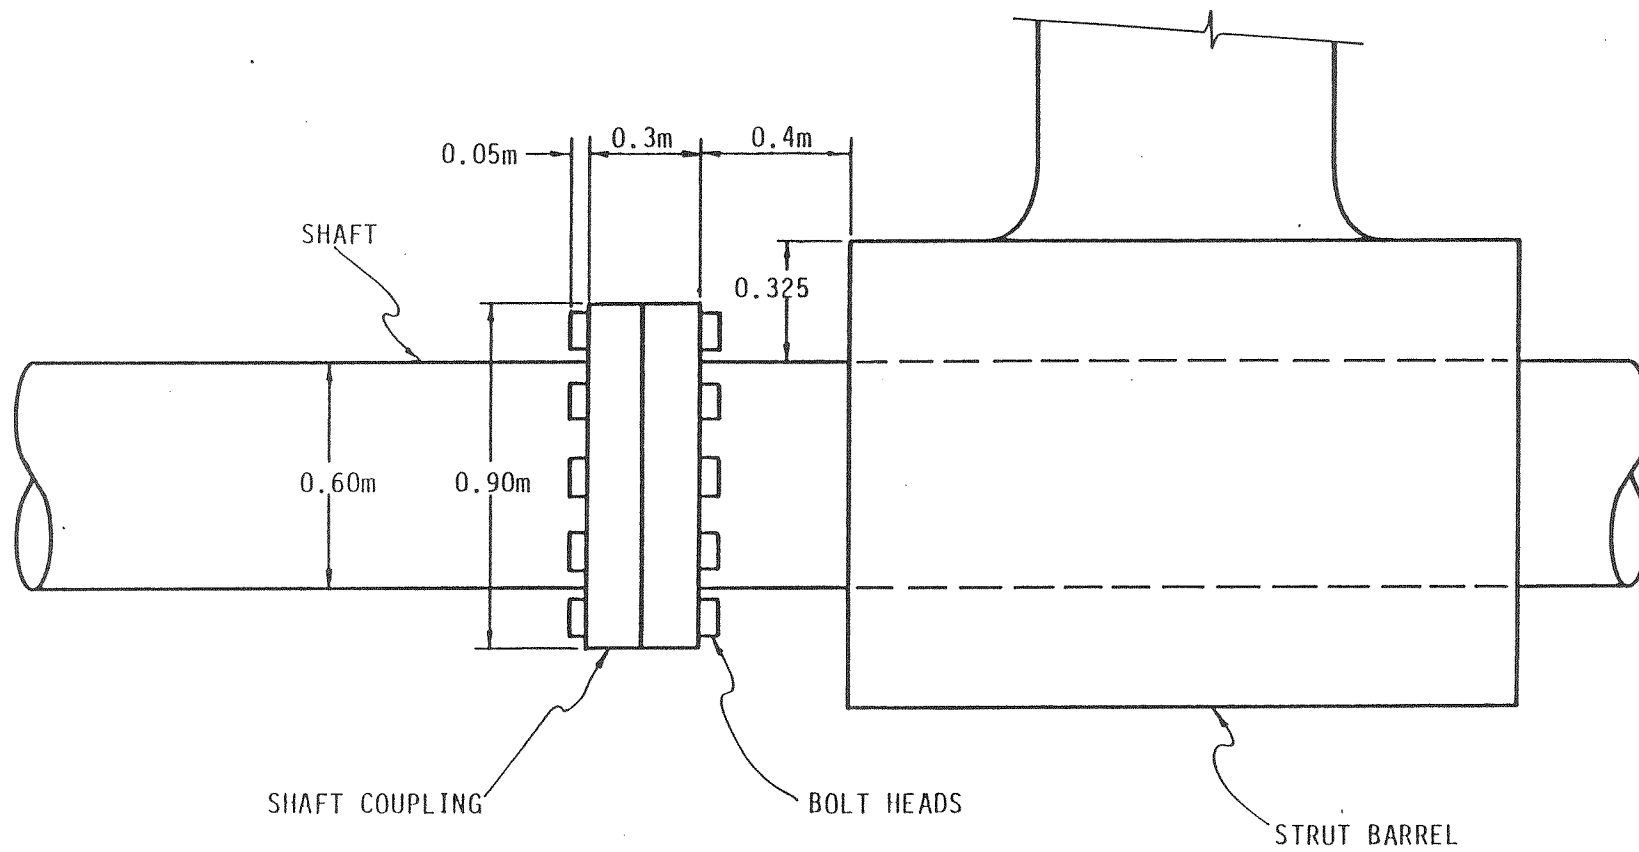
SAMPLE STRUT BARREL AND SHAFT COUPLING
